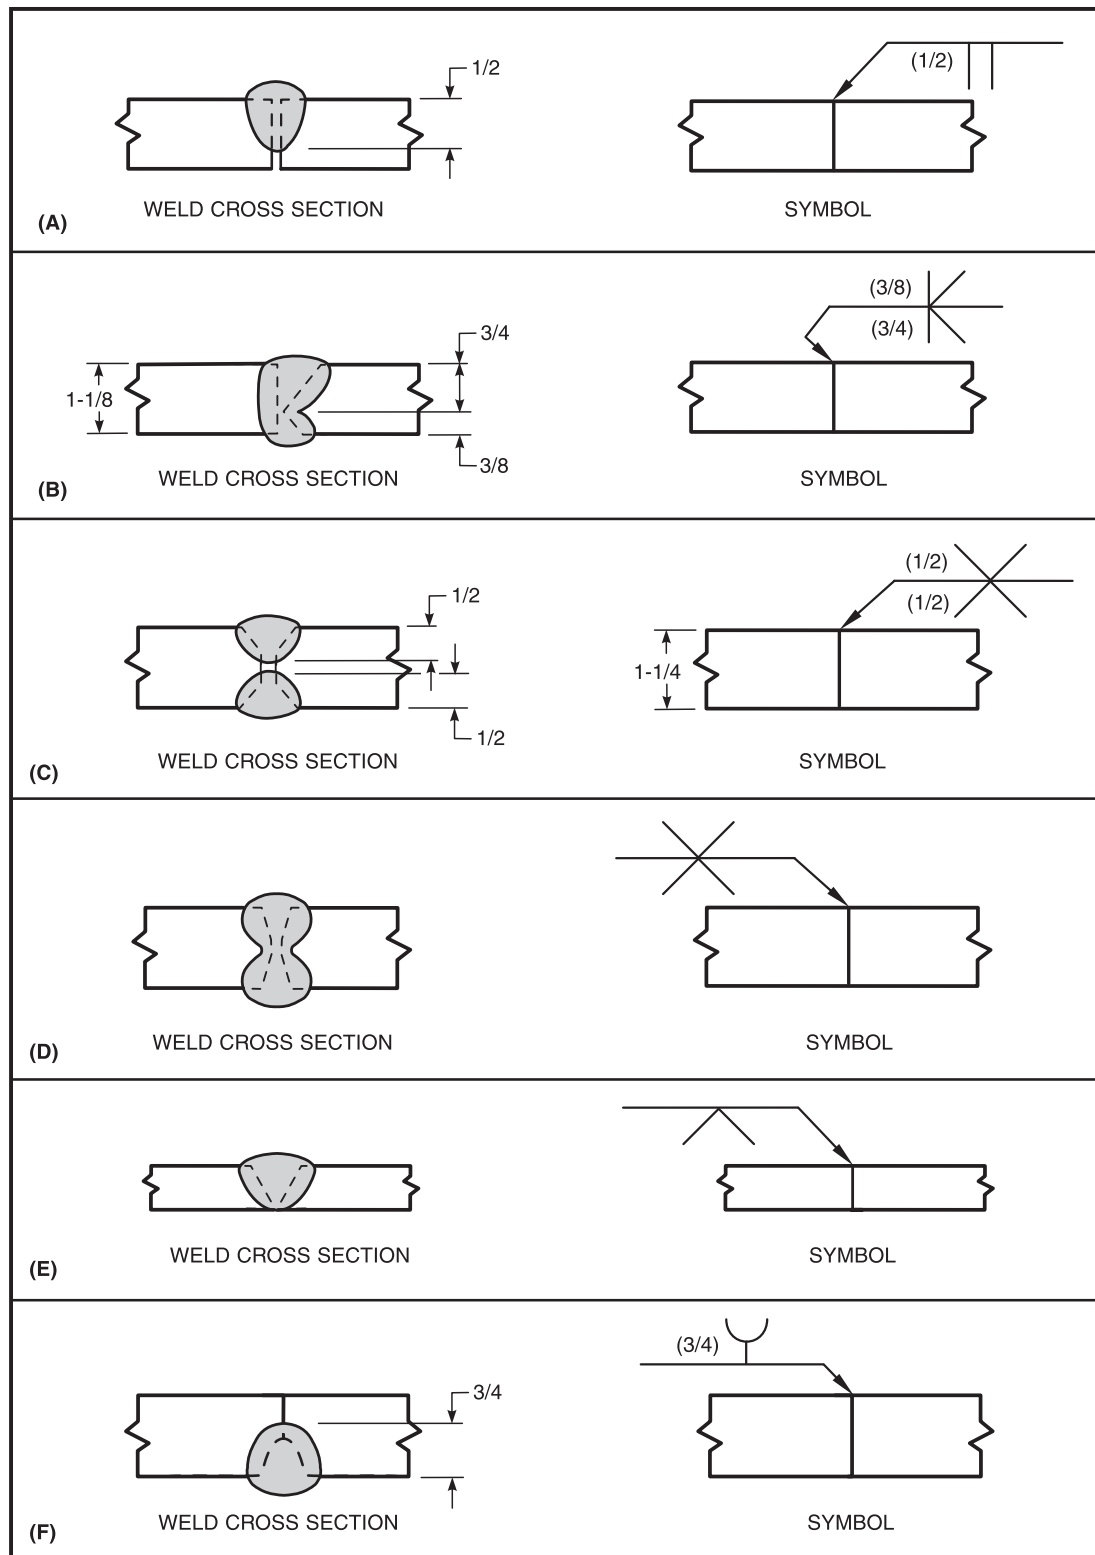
Specification of Groove Weld Size, Depth of Groove Not Specified
